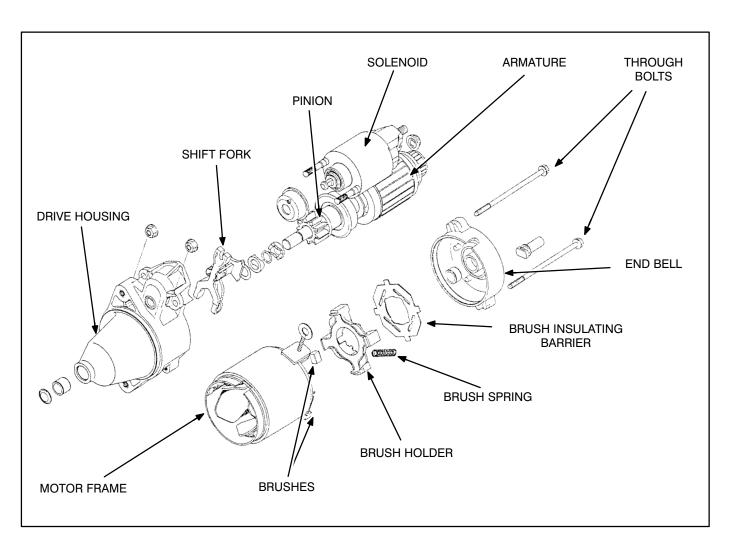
STARTER ASSEMBLY, ELITE E140H ENGINE
